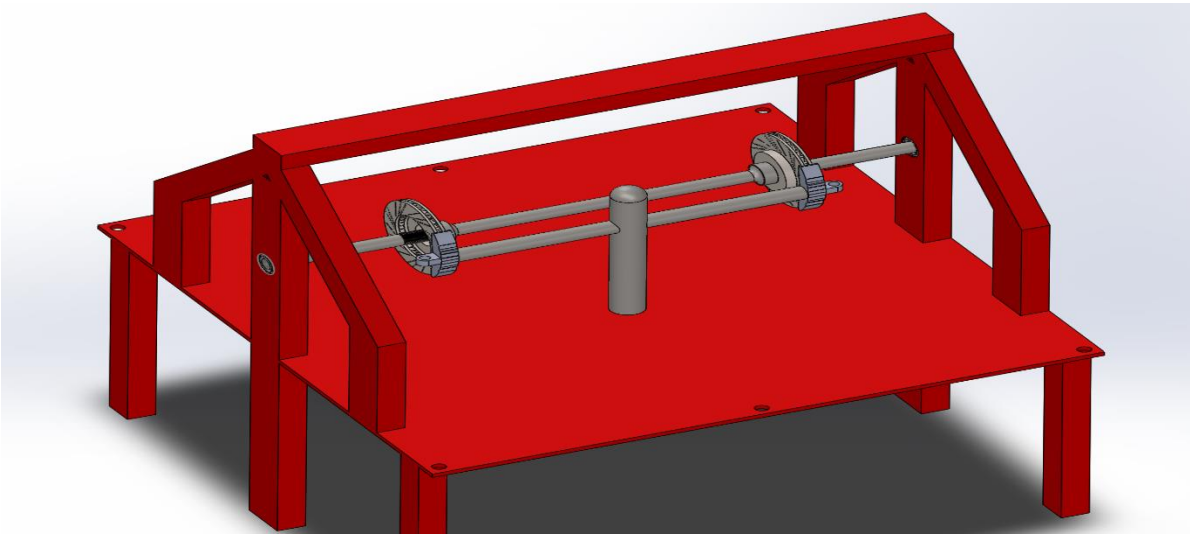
(Assembled) Caliber stand with shafts, caliber and other parts
